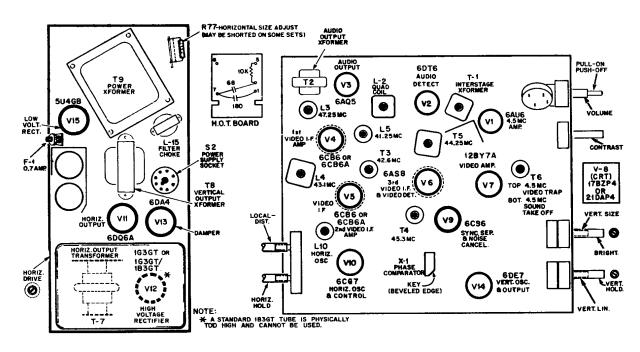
TUBE LOCATION AND ALIGNMENT POINTS DIAGRAM, POWER SUPPLY AND ETCHED PRINTED CIRCUIT BOARD CHASSIS
